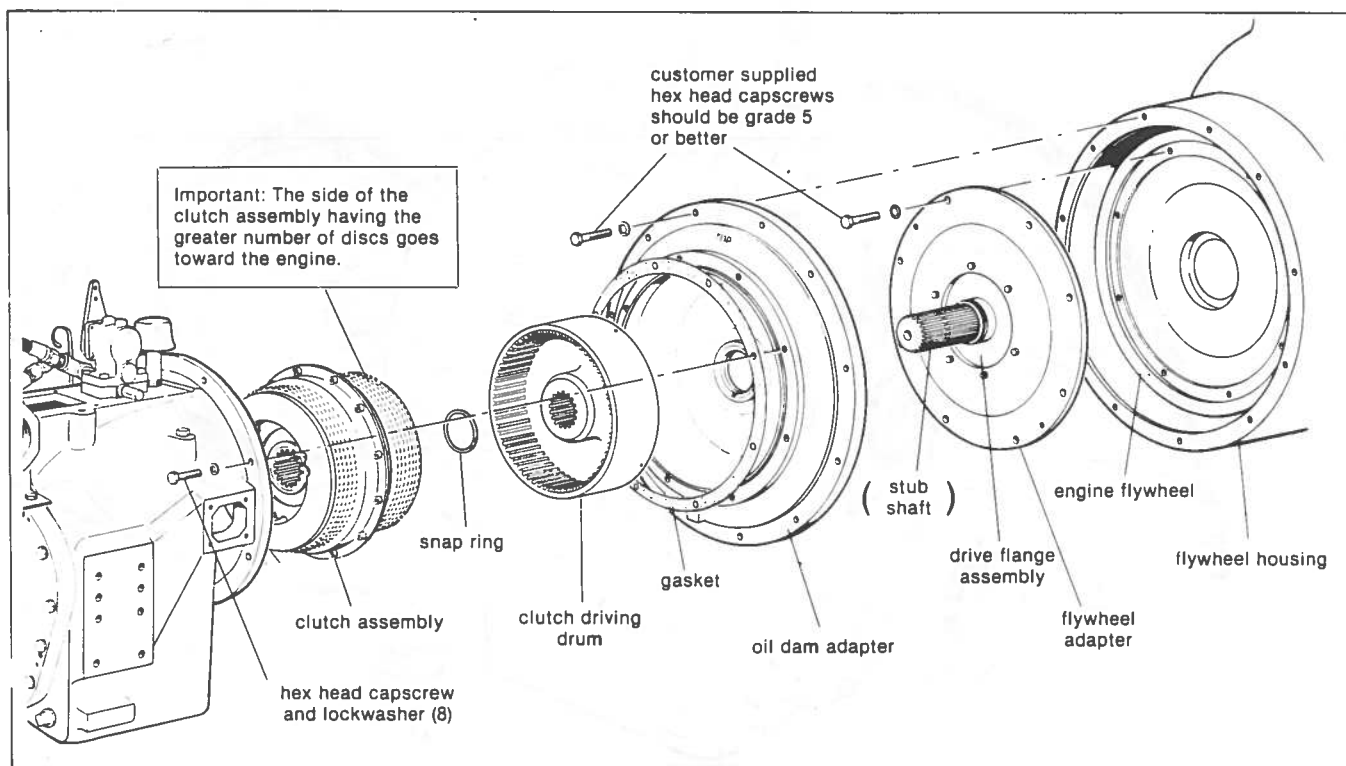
Assembly Sequence of Clutch and Adapter Parts.
